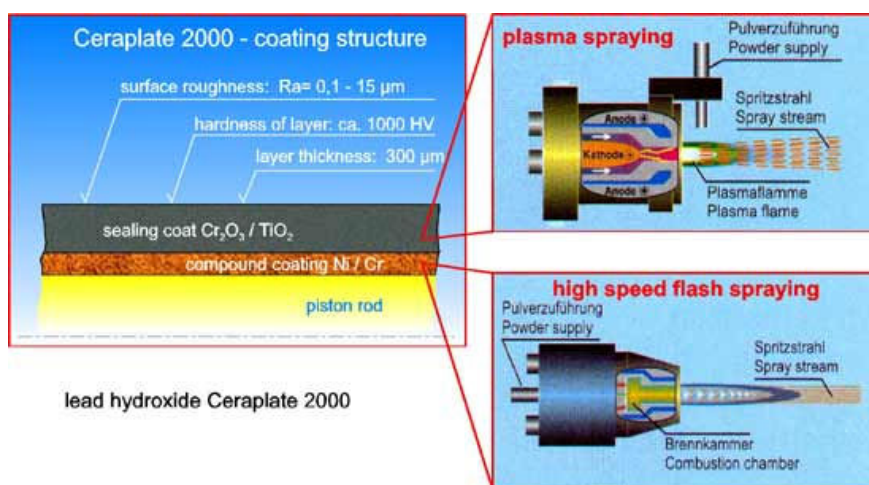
Sketch of Ceraplate coating 2000 for hydraulic piston rods (Hunger Corporation) [26]
